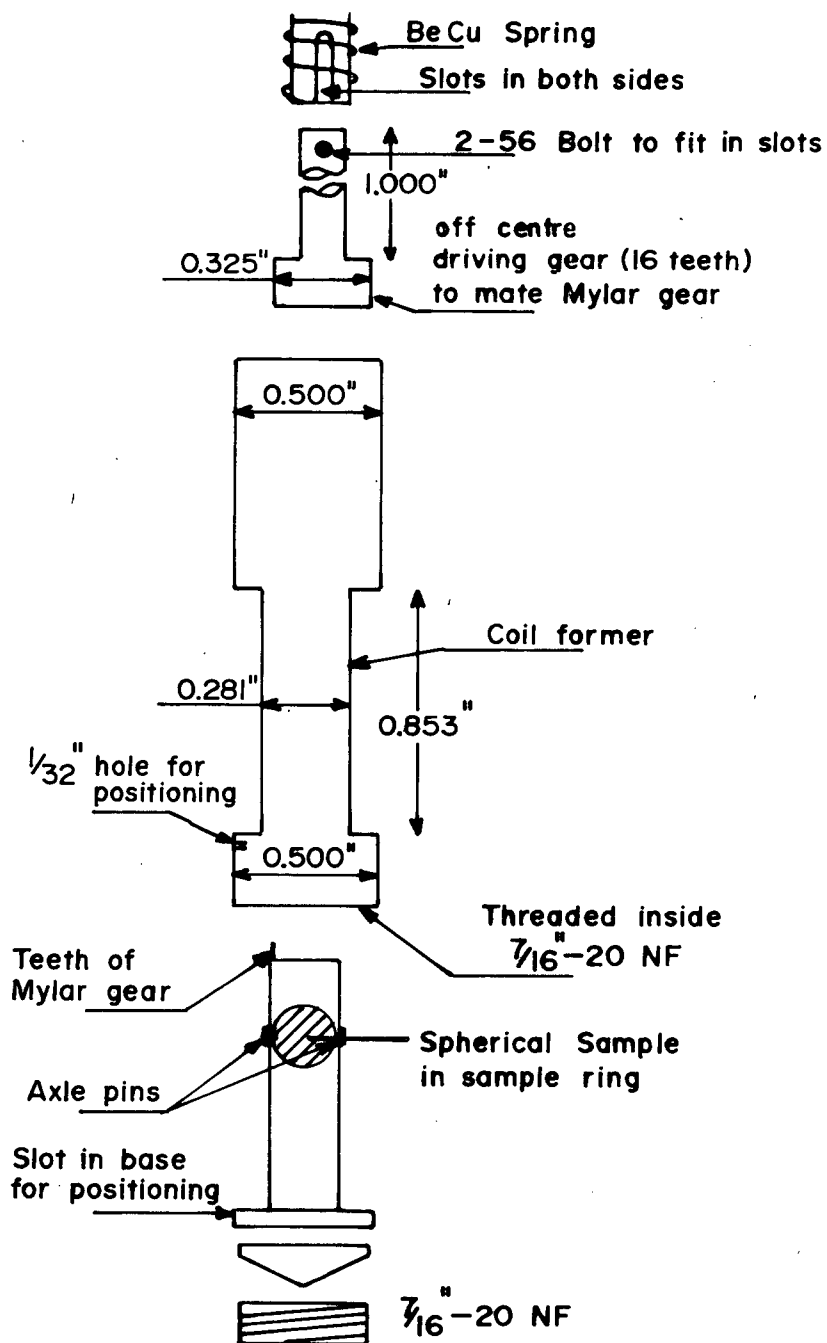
Sample Rotator With Driving Gear, and Coil Former
